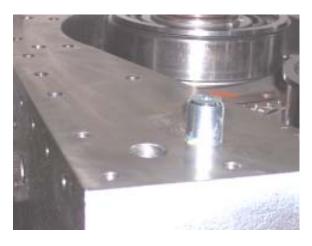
Lubrication Oil Pressure Relief Cartridge Installed
